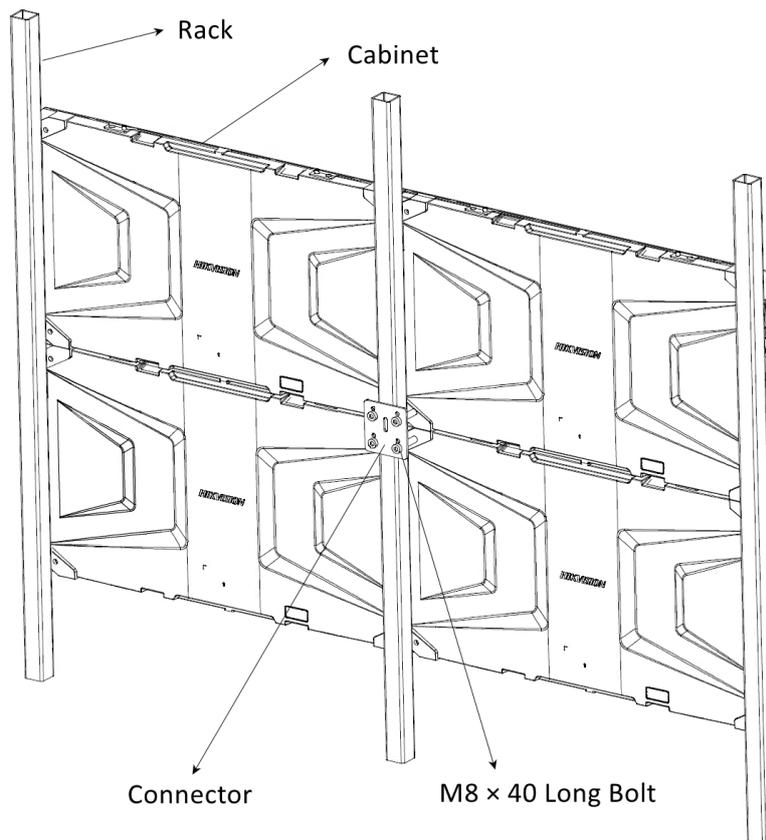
Fix the Cabinet, Connector and Rack (Rear View)
